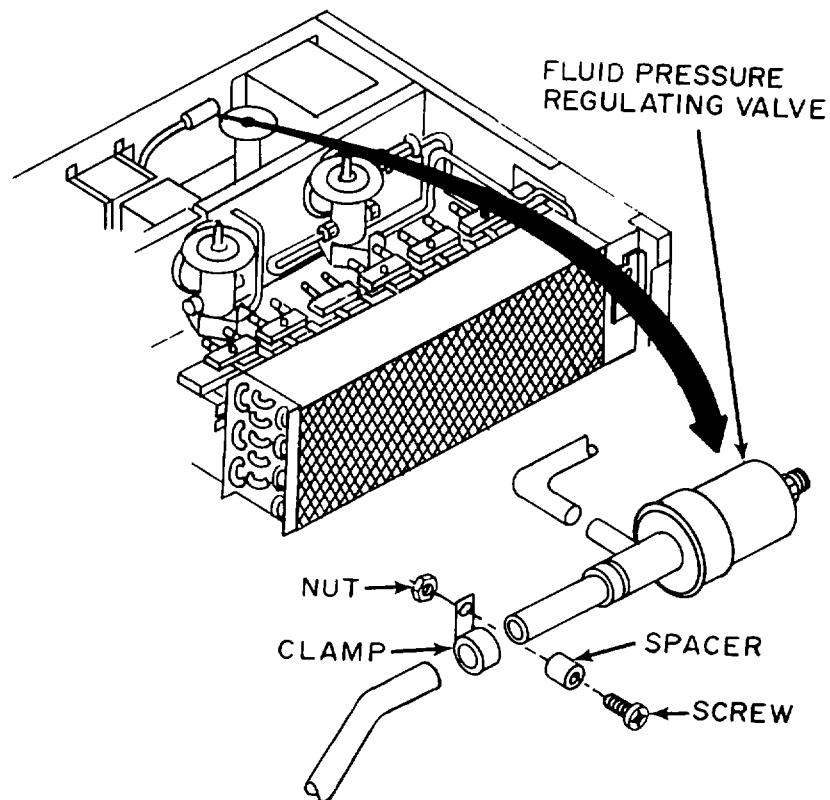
Fluid Pressure Regulating Valve (V2)
